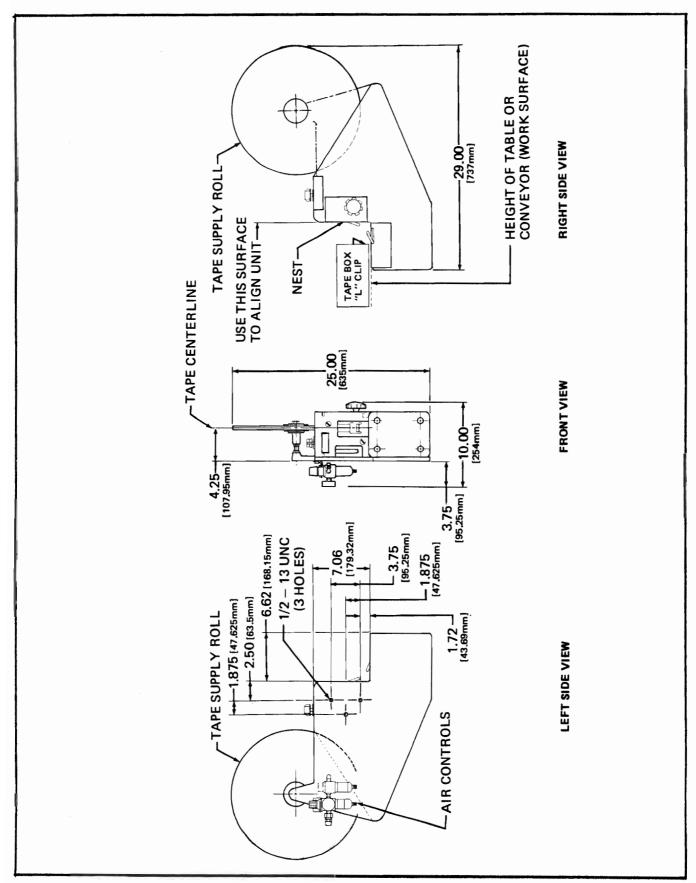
MOUNTING - BOTTOM TAPING POSITION
